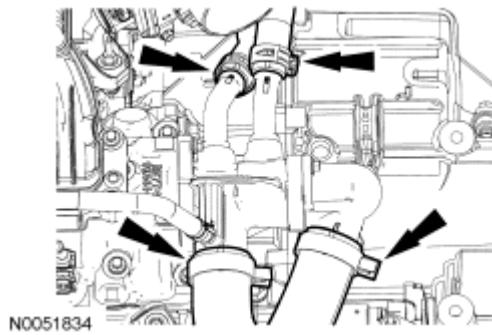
Locating Upper Radiator Hose, Lower Radiator Hose & Heater Hoses
